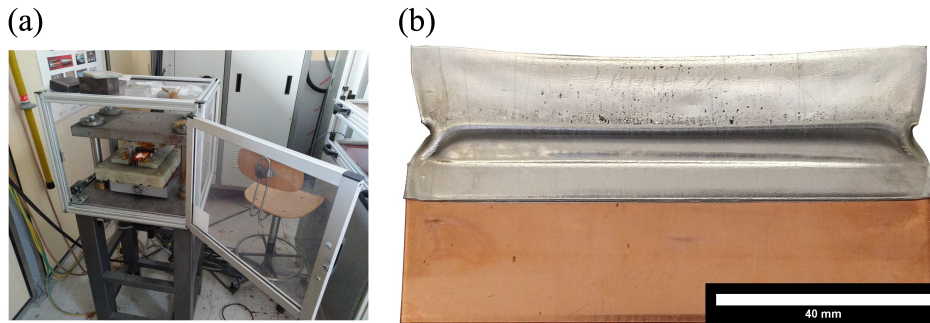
Experimental MPW machine and samples - (a) Setup for the MPW machine - (b) Al/Cu welded joint produced by MPW
